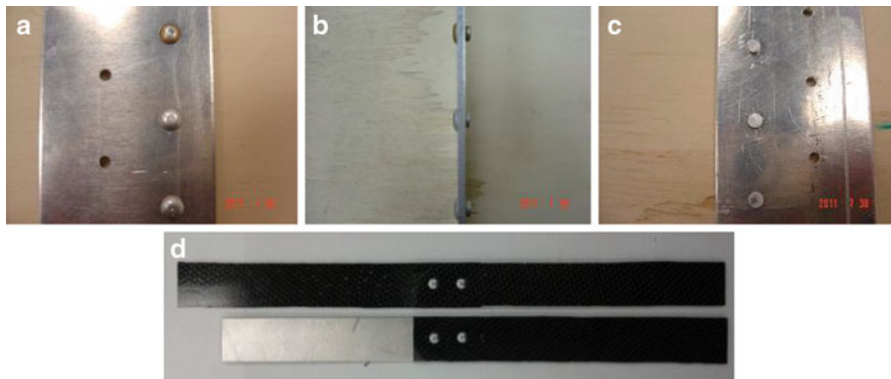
Robot riveted samples. (a) front—metal, (b) side—metal, (c) back—metal, (d) composite
